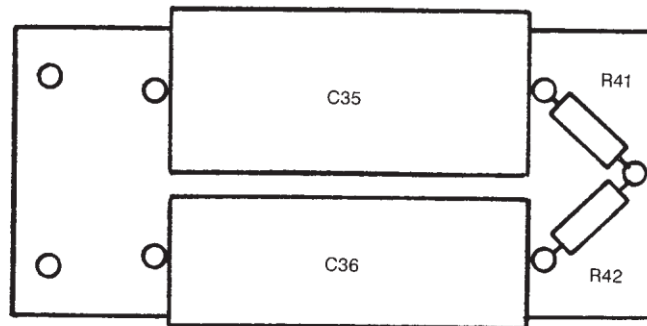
SPARK SUPPRESSOR BOARD 828255
